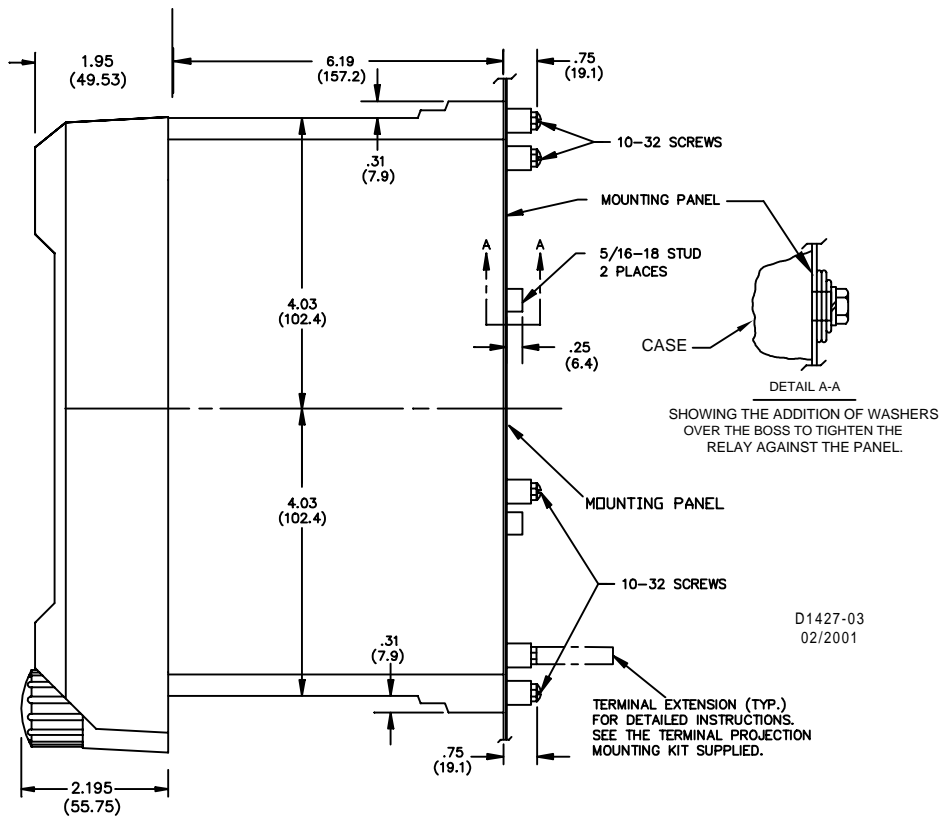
S1 Case, Double-Ended, Projection Mount, Outline Dimensions, Side View
